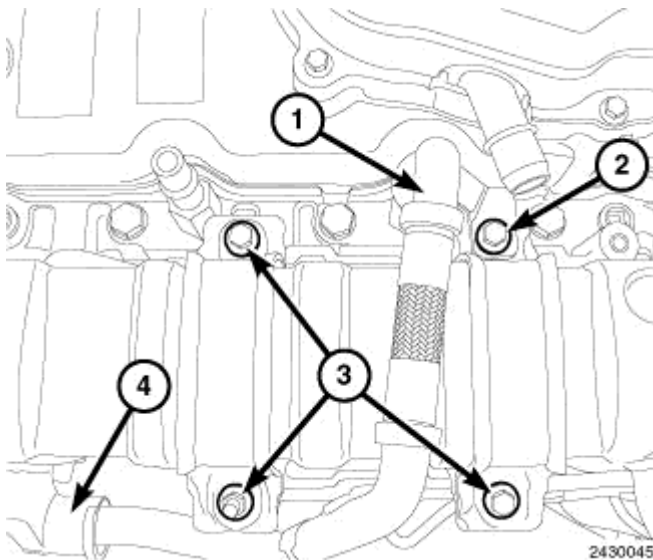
EGR Cooler Inlet Flange Nuts
